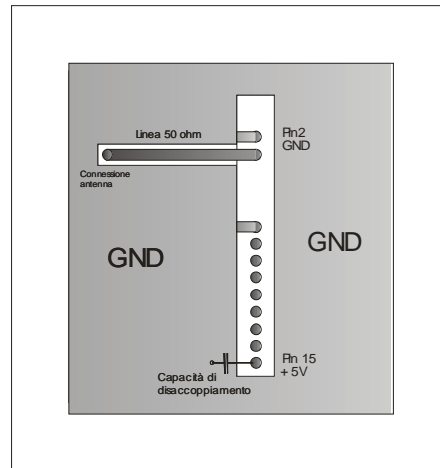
Recommended layout RX-4MHCS-SE host board
